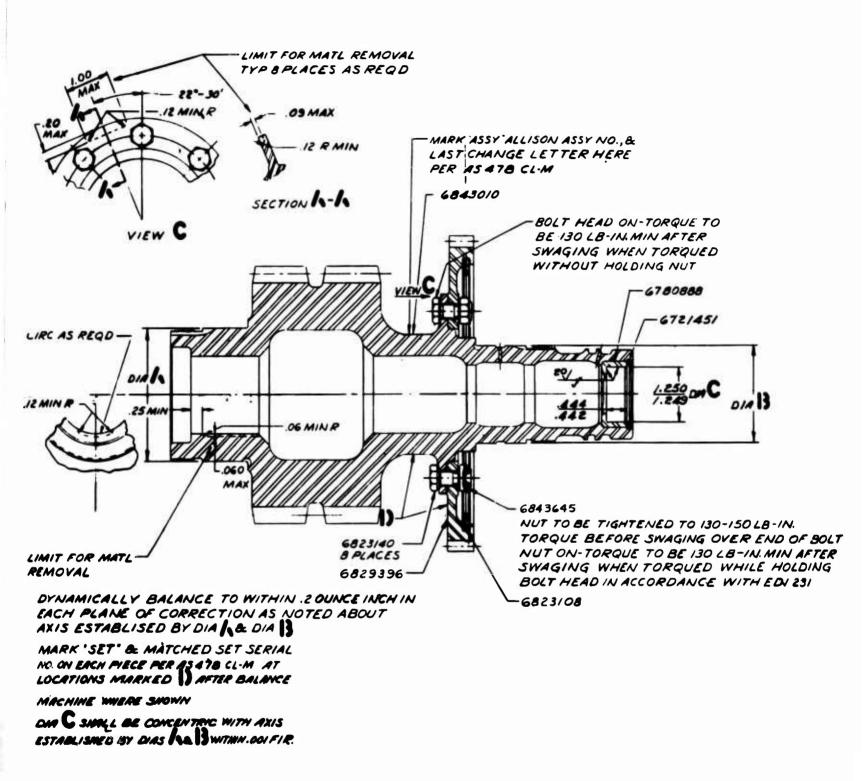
Pinion and Accessory Drive Shaftgear Assembly.
